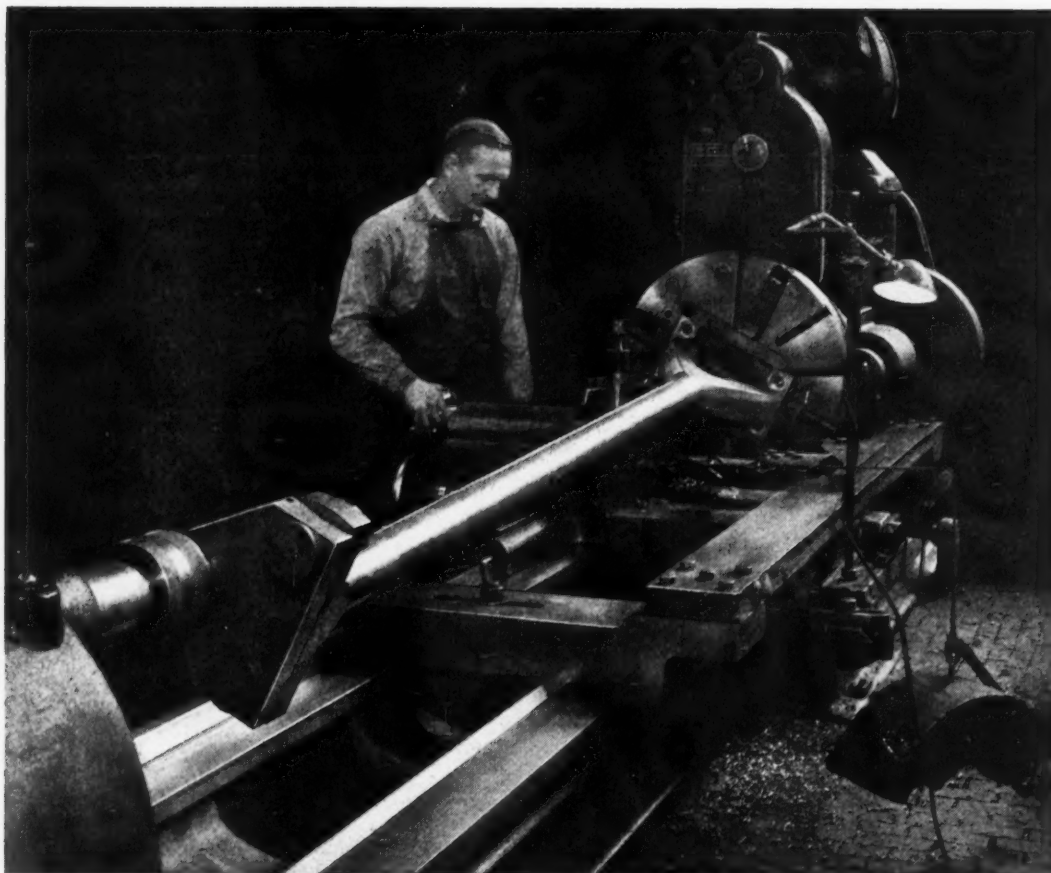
(Above) Turning the Arm of an Eccentric Rod by the Use of a Set-over Device that Produces Concentric Rotation
